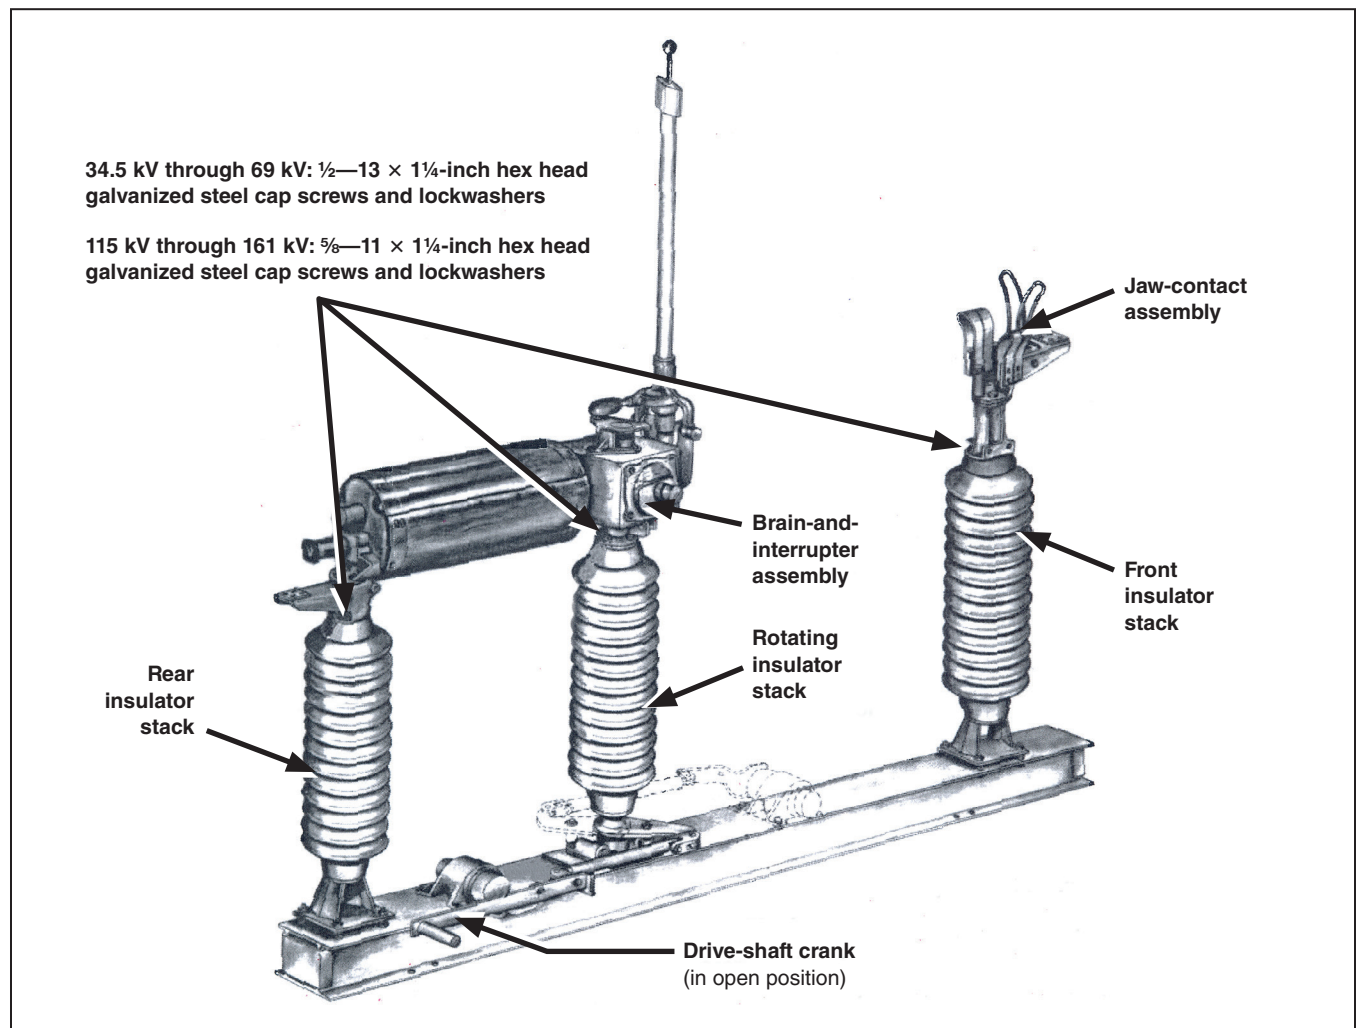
Brain-and-interrupter assembly and jaw-contact assembly mounted on insulator stacks.
